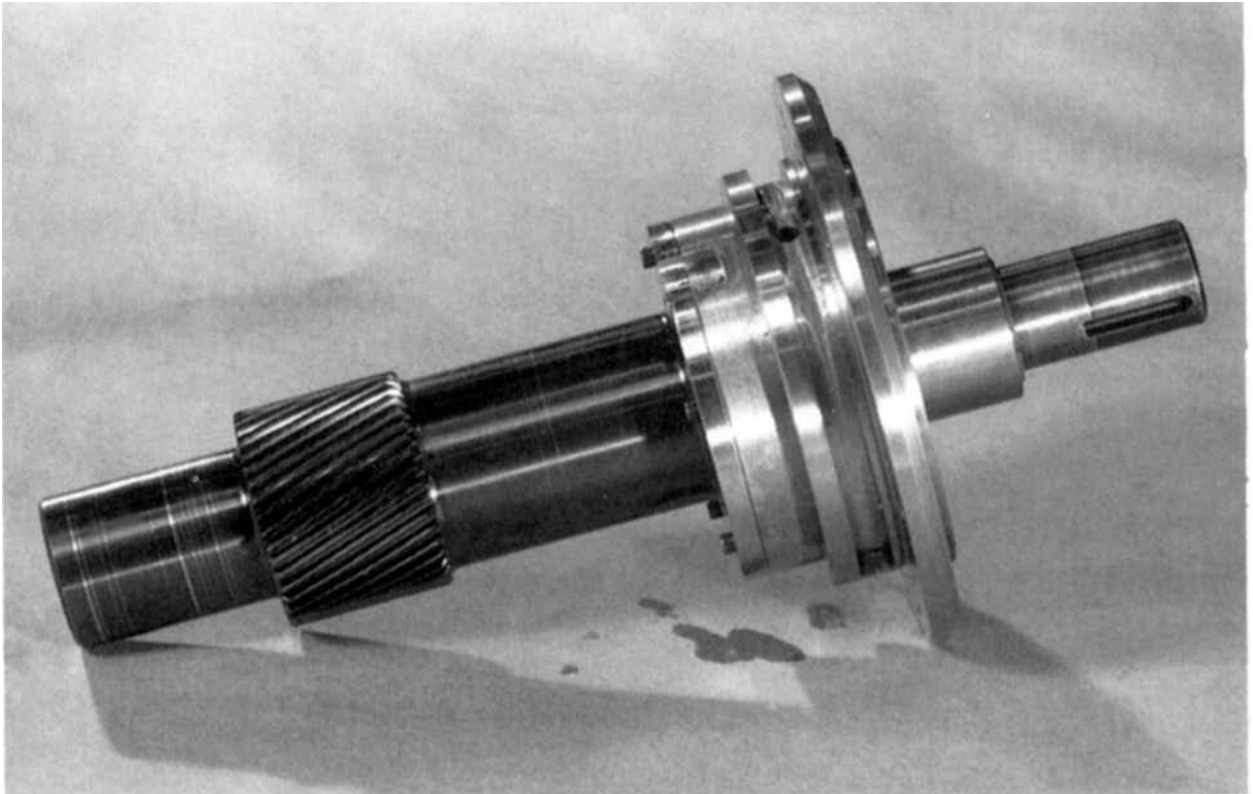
Kingsbury-type Thrust with Tilting Pads
